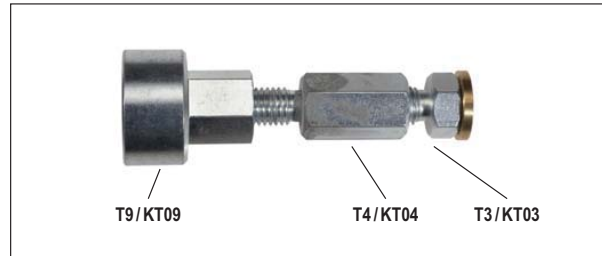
ON-VEHICLE INNER SEAL INSTALLATION TOOL (L2)
